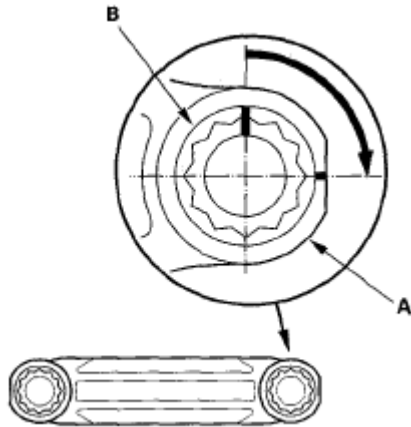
Identifying Connecting Rod Bolt Tightening Angle
